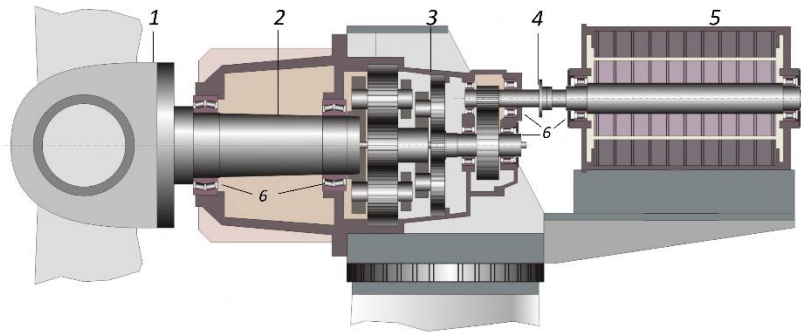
Geared drive train configuration. 1. rotor, 2. low-speed shaft, 3. three-stage gearbox, 4. high speed shaft, 5. generator, 6. bearings. Figure adapted from Teng et al. (2017)
